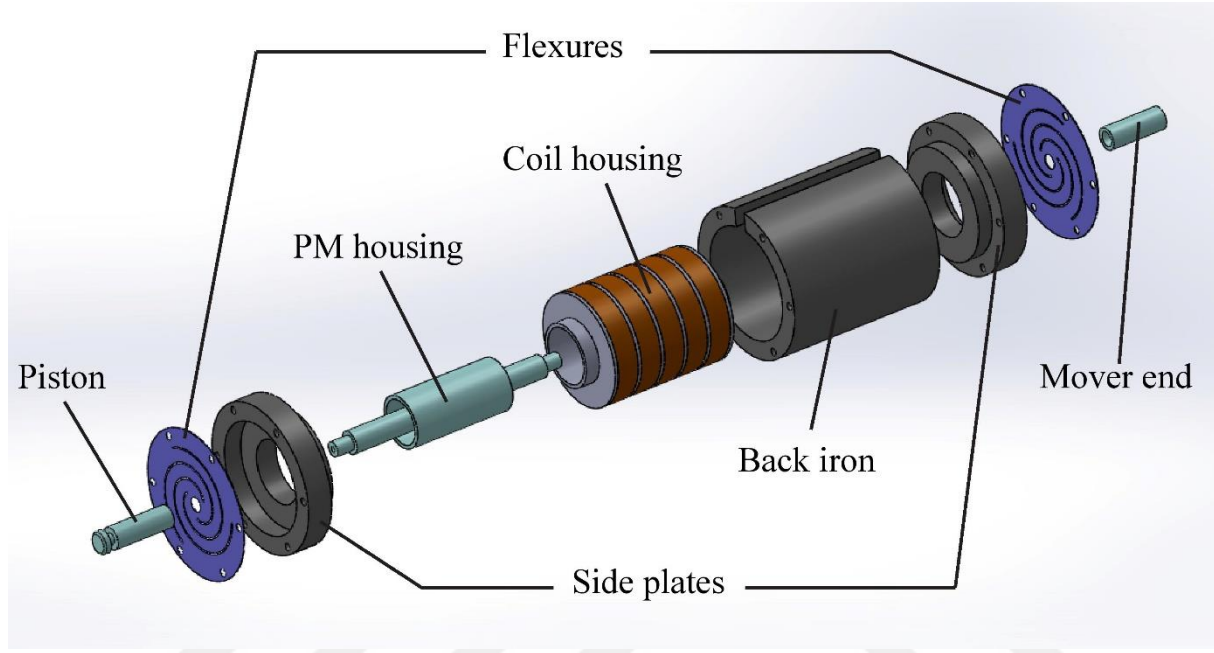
Exploded view of the linear oscillatory motor assembly
